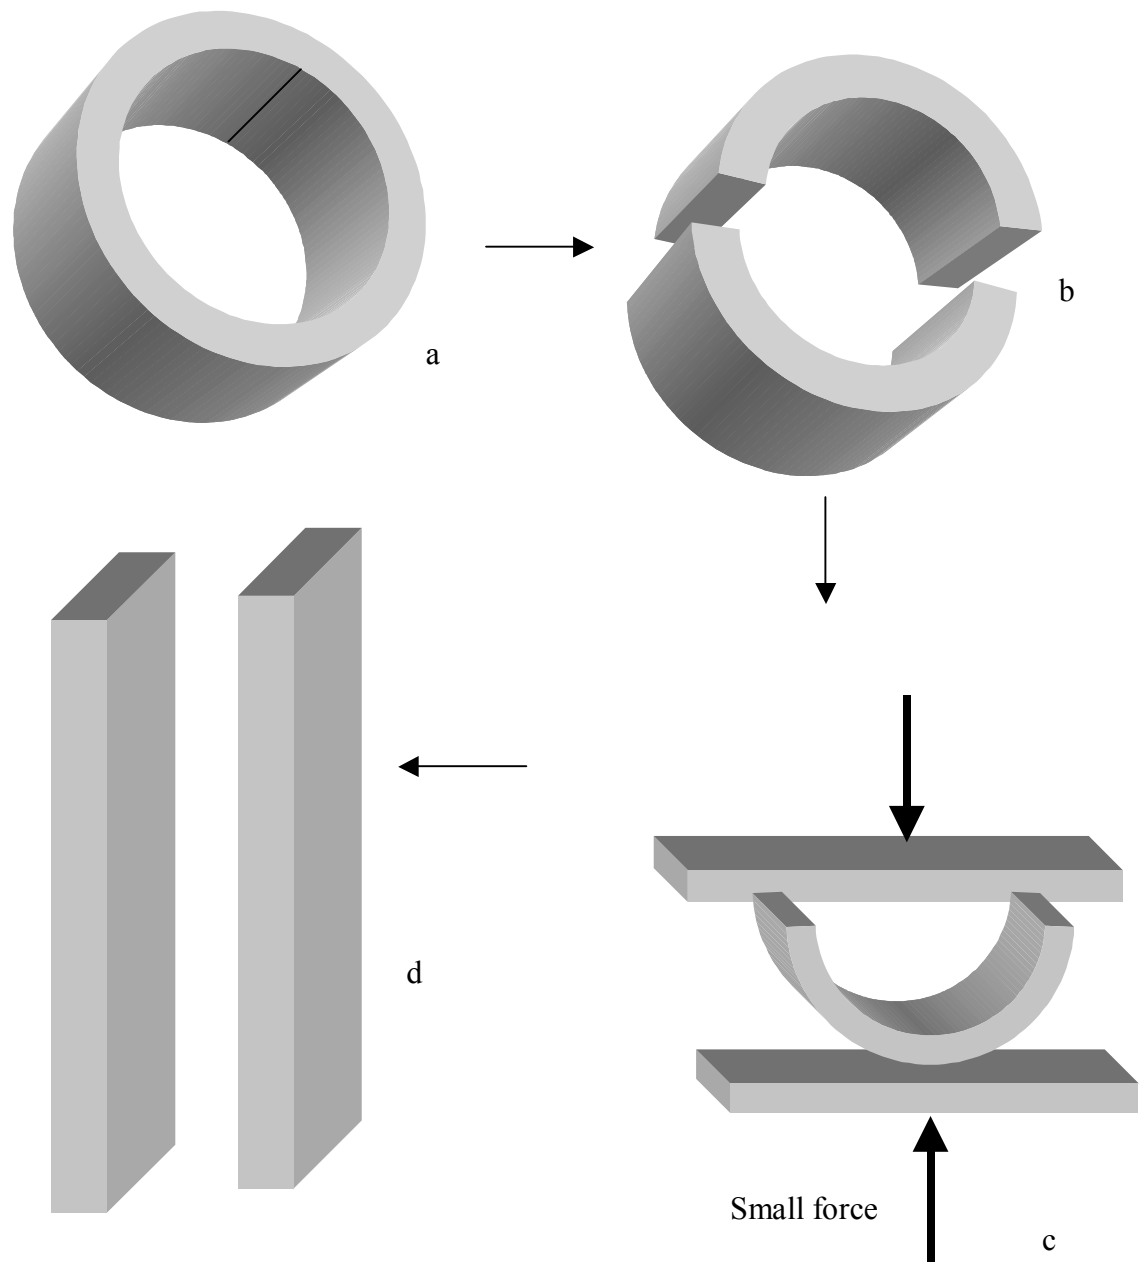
Procedure for making flat plates from rings (a) The ring cut from coupling, (b) ring cut into two parts, (c) the half ring is heated at 105°C and straightened between plates and (d) flat plates.
